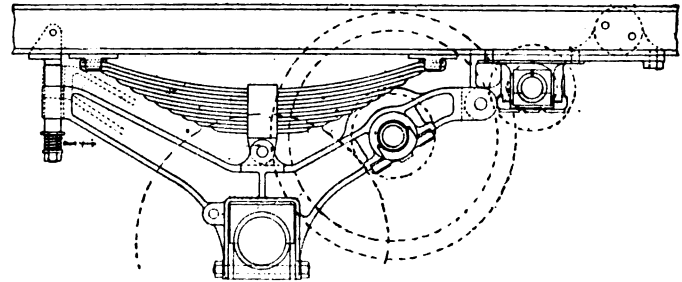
DIAGRAM SHOWING ARRANGEMENT OF REAR SHAFT AND AXLE.
